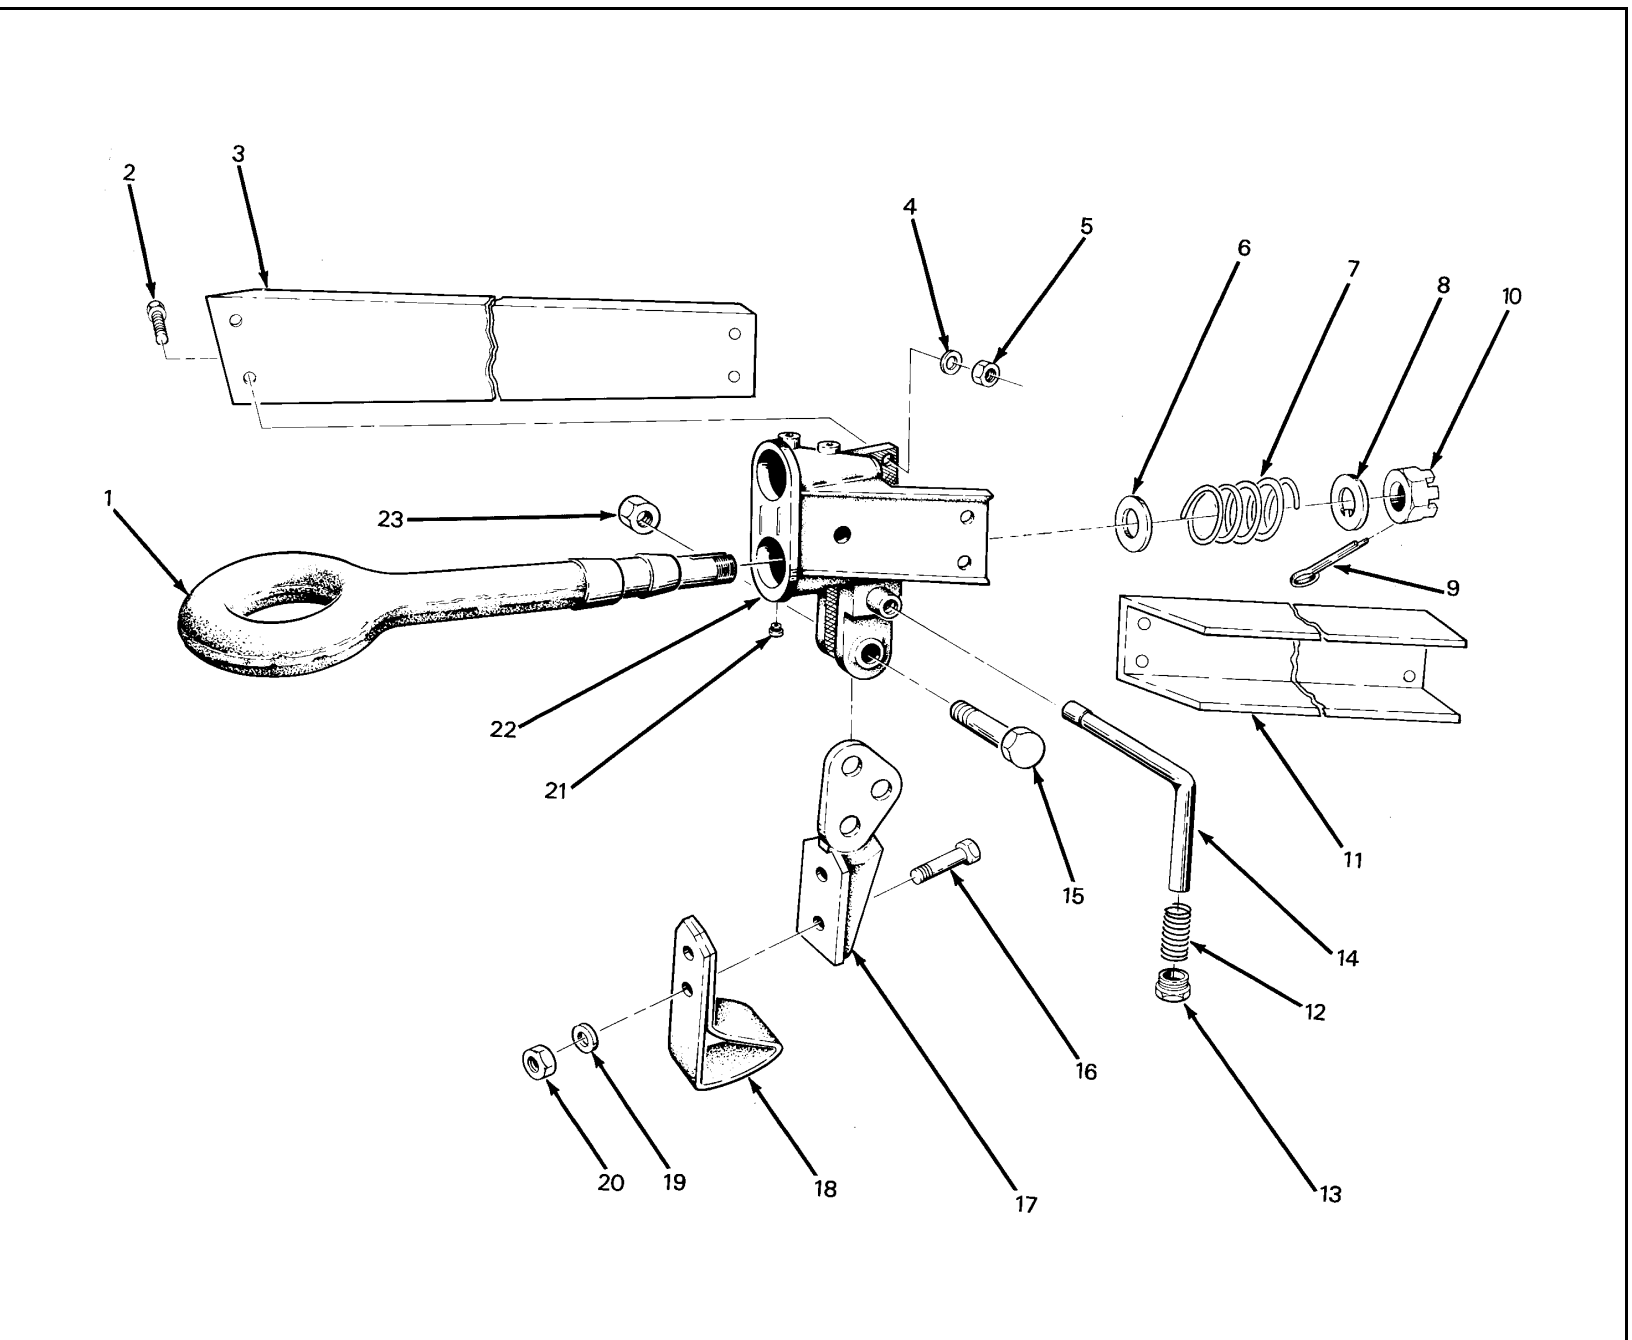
(Sheet 1 of 2) Drawbar Bracket Assembly
